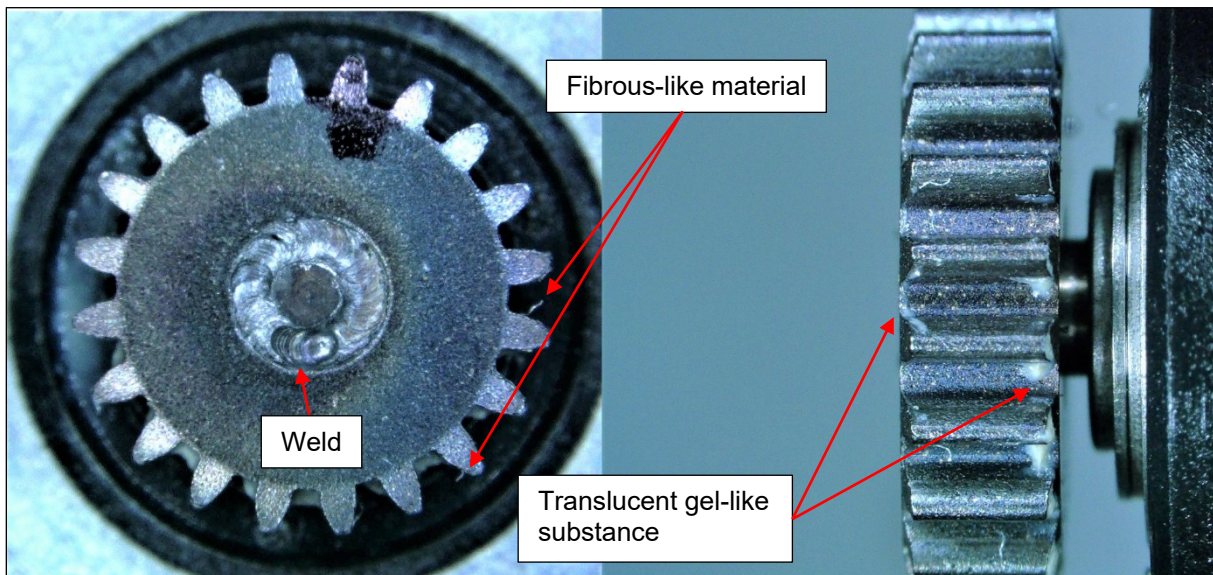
Pinion gear under magnification. Locations of weld, fibrous-like material and translucent gel-like material shown.
